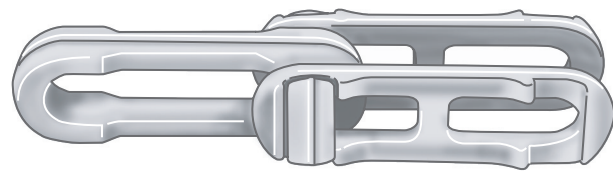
REGULAR DROP FORGED RIVETLESS CHAIN
